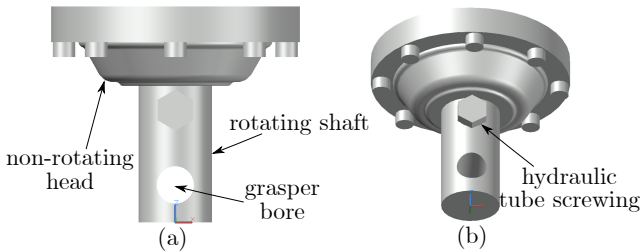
Model of the rotator unit shown in profile view (a) and as a 3D model (b).
